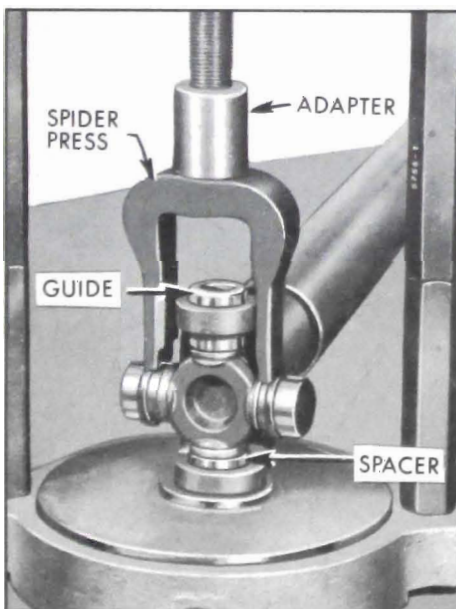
Removing Bearing With Guide and Spacer in Place
